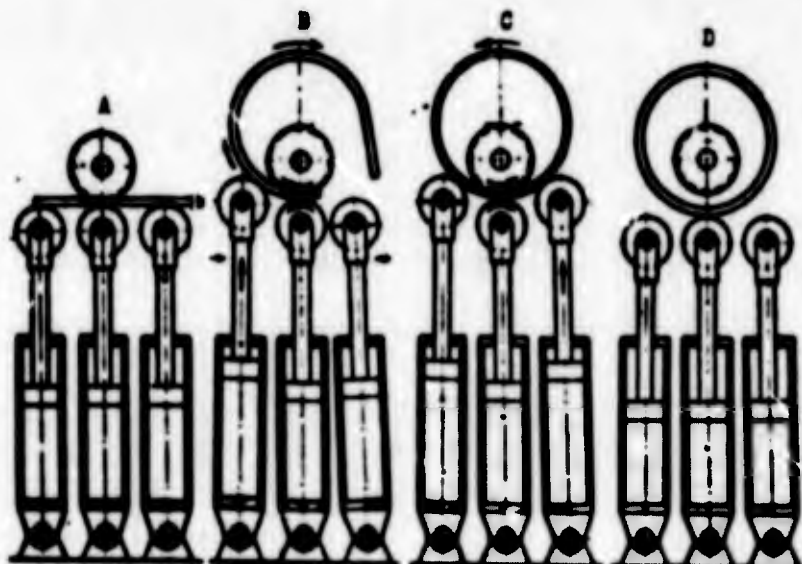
Diagram of bending of ring on shape-bending machine.
